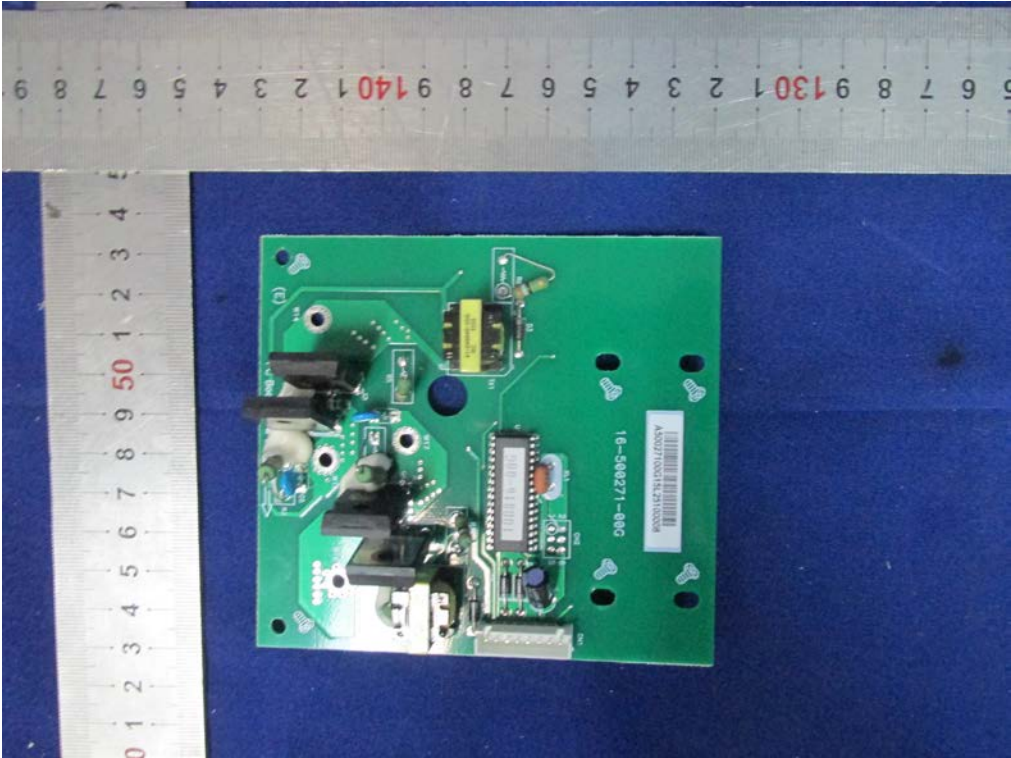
FlinInfini Lite 5kW-48V PCB of SCR board components view
